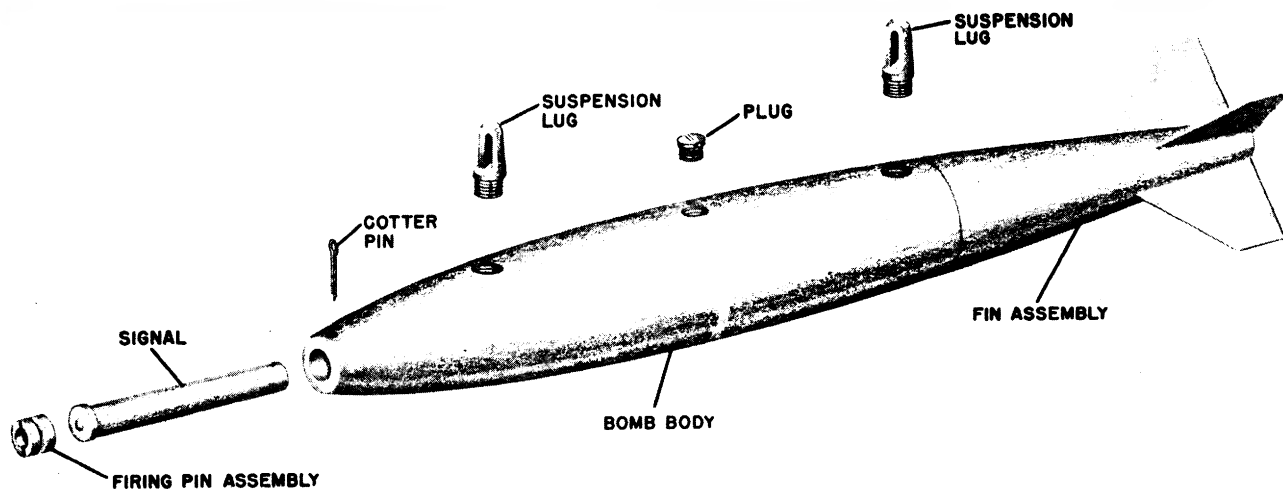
56-Pound Practice Bomb Mk 89 Mod 0, exploded view.
